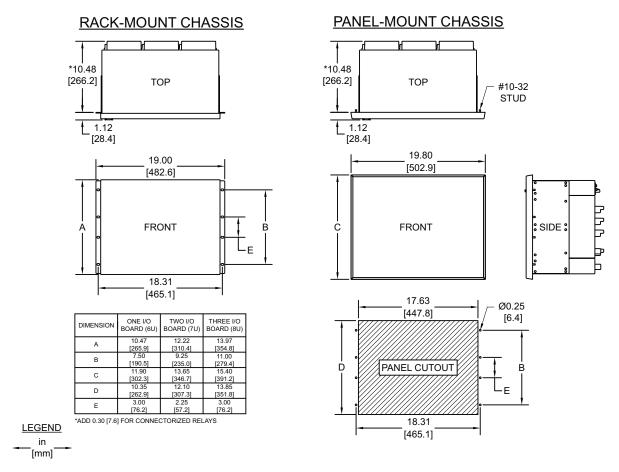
SEL-487E 6U, 7U, and 8U Chassis Dimensions
